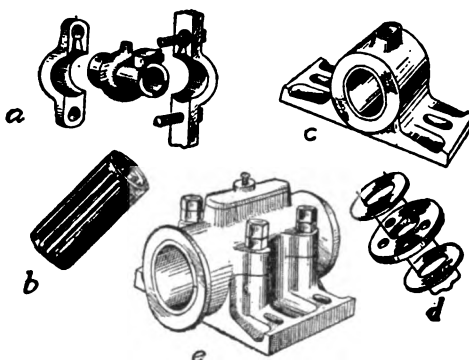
The bearings are the centre of machine efficiency: *a* self-aligning bearing; *b* roller bearing; *c* plain bearing; *d* ball bearing (the balls fitting in the small openings in the centre plate); *e* split bearing (Ore. Bulletin, 133).
